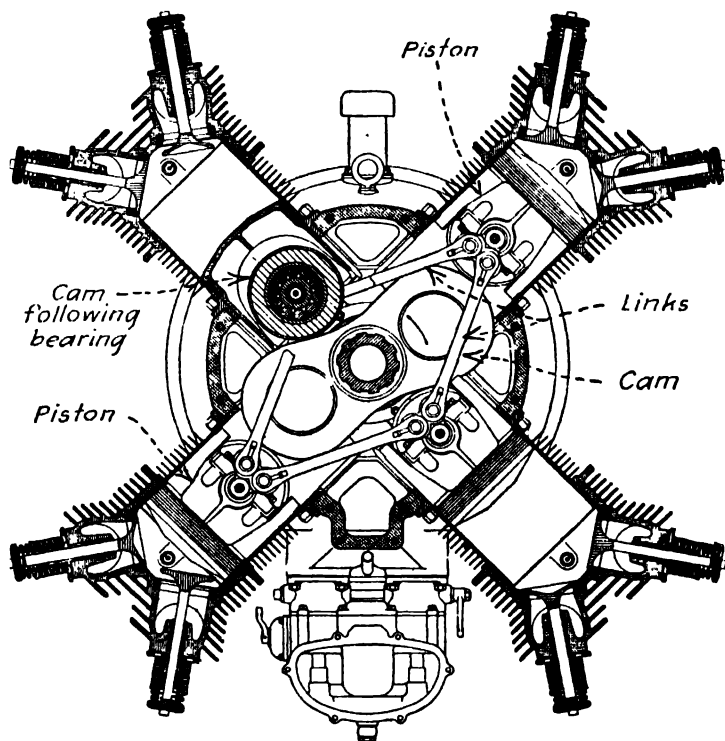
Plan Sectional Drawing of Caminez Engine that Uses a Figure Eight Profile Cam Instead of Crankshaft for Operating Pistons and Receiving Power Impulses.
